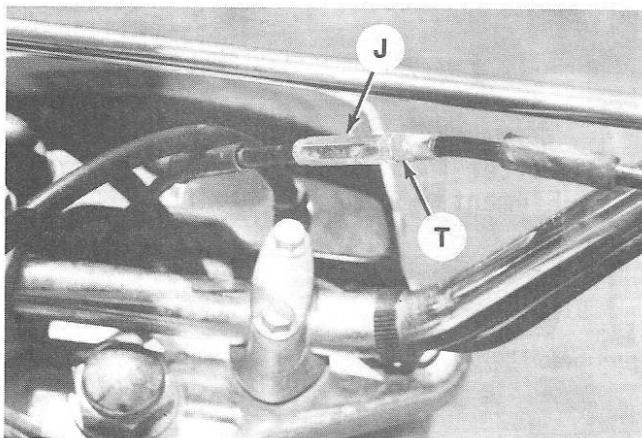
Loosen locknut (T) and turn adjuster (J) to adjust throttle lever free play.
